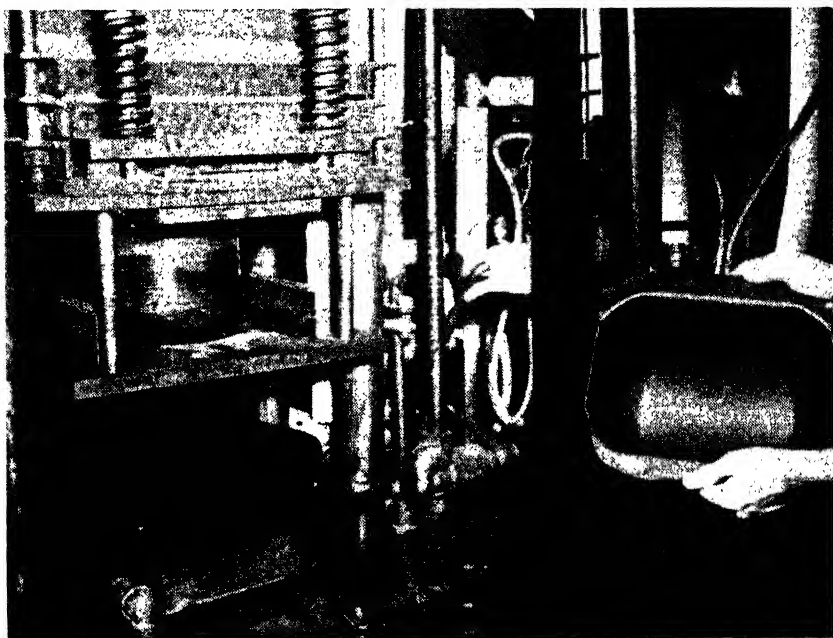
Blanks of proper shape and correct moisture content, drawn in a double-action die and cured under pressure, produce tough masks and helmets. (Courtesy Continental Diamond Fibre Co.)
